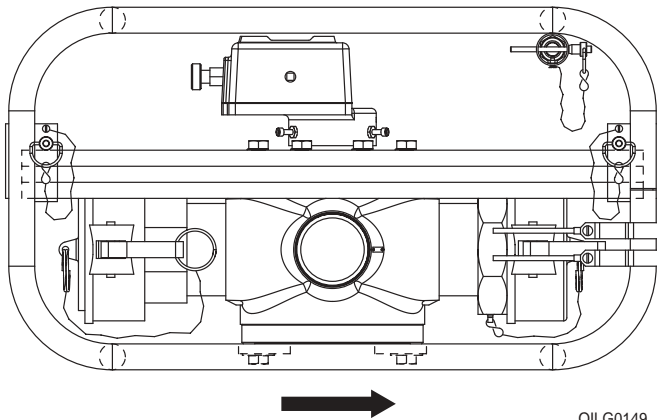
The Oilgear type PL liquid meter looks like a short section of pipe with a rotor and rotor chamber offset, and is perpendicular to the “flow axis.”
